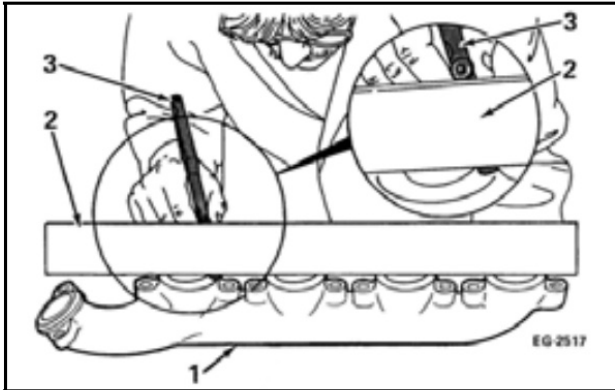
Inspecting Exhaust Manifold for Warpage
